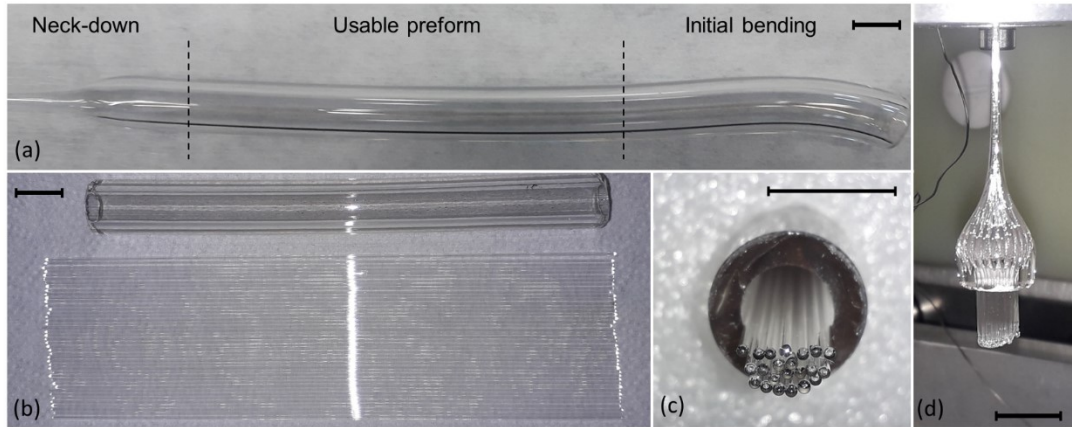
Steps during the preform assembly: (a) the usable portion of the external tube is cut; then all the internal and external tubes shown in (b) are assembled; an intermediate step of the assembly is reported in (c). Finally, the assembled preform is mounted onto the drawing tower and, upon heating, the neck-down occurs (d). All the scale bars are equal to 10 mm.
